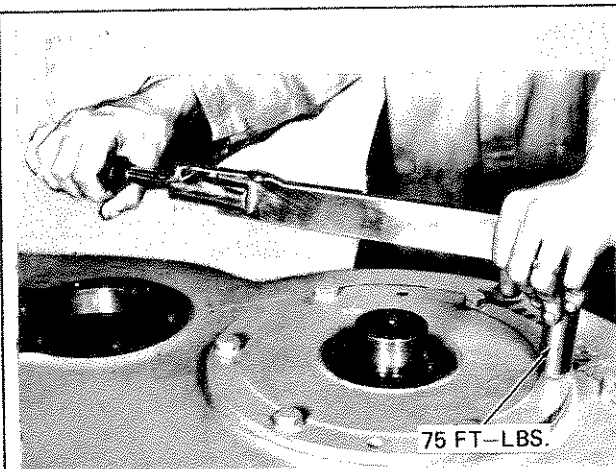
Installation Of Drum And Drum Shaft (Sheet 2 of 3)
